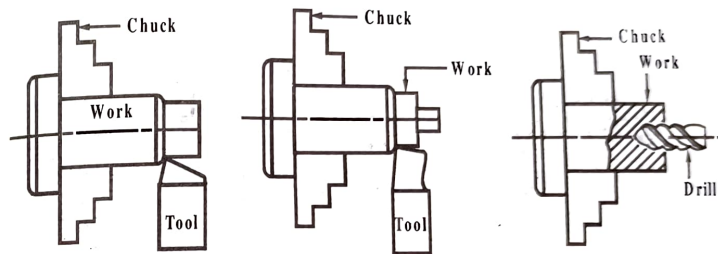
Plain Turning Fig. 2.42 Step Turning Fig. 2.43 Drilling
